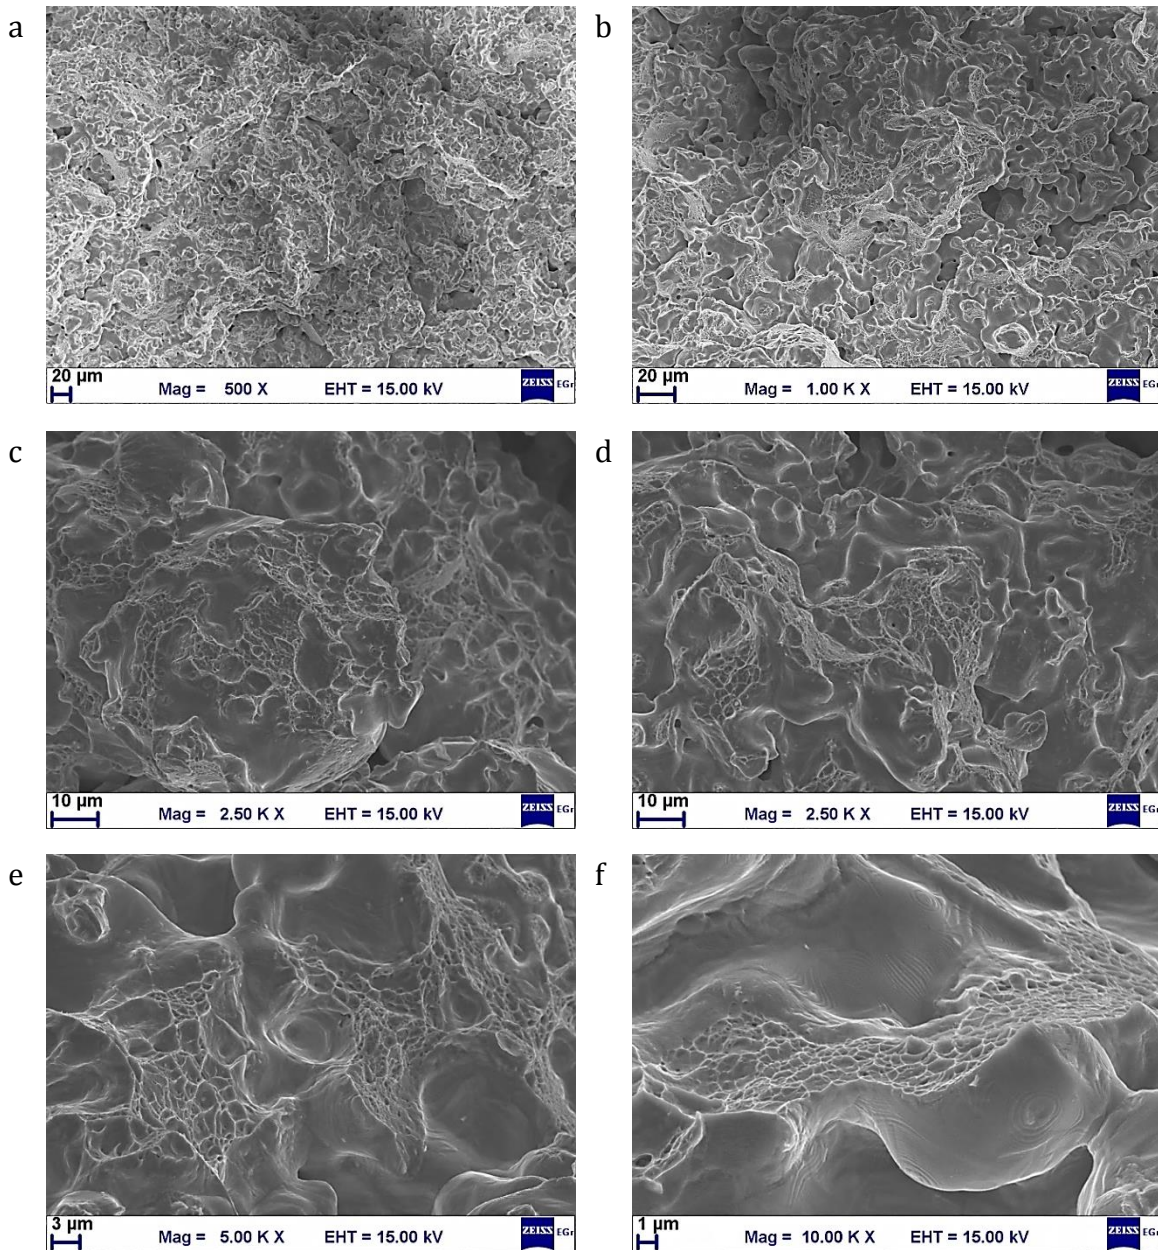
Fracture surface of DHP-T200 sample showing the general appearance of fracture surface at low magnifications (a, b) and interparticle and transparticle ductile dimple fracture (c-f).
